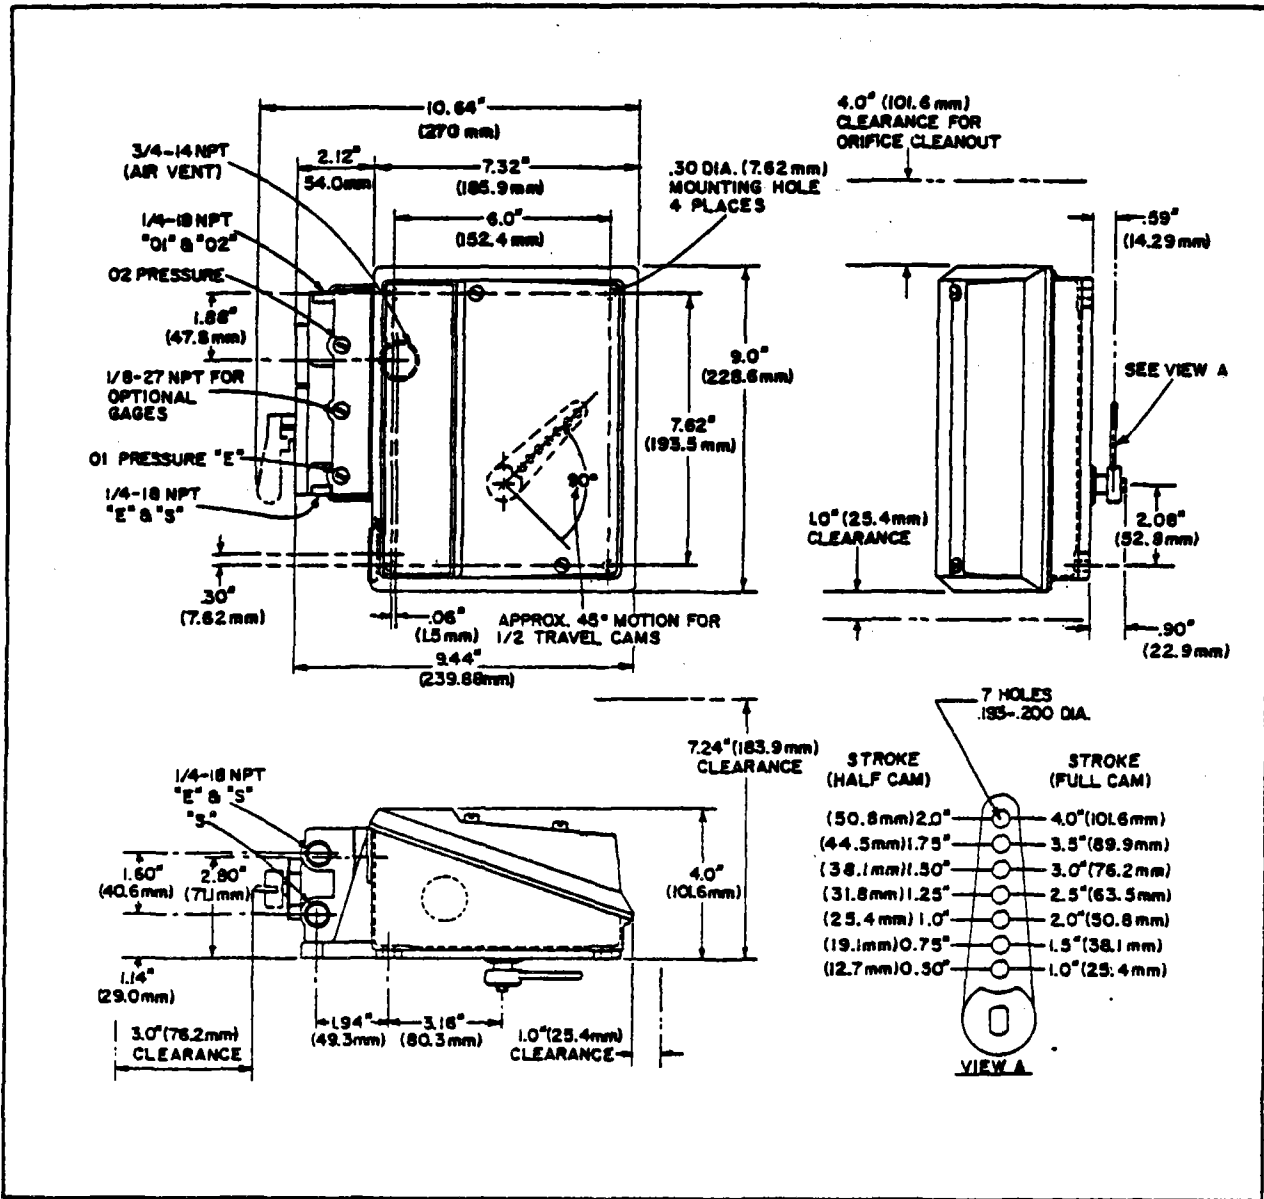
Mounting and External Dimensions of Type AP2 Characterizable Pneumatic Positioner
